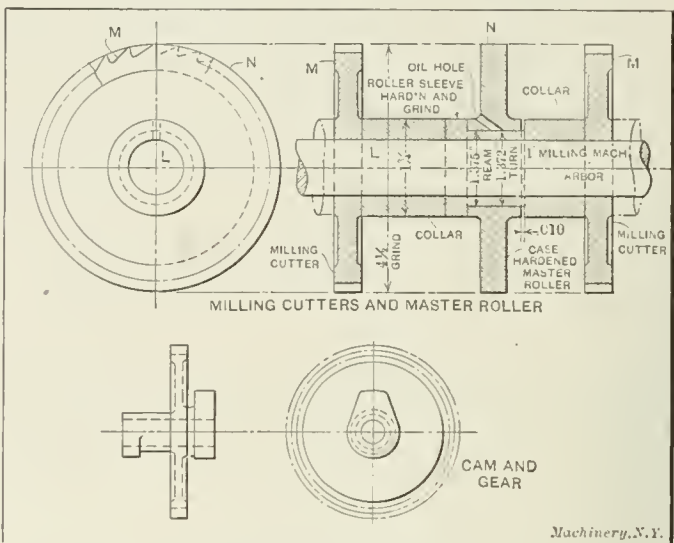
Details of the Cam to be milled, and Arrangement of Cutters and Master Roller
